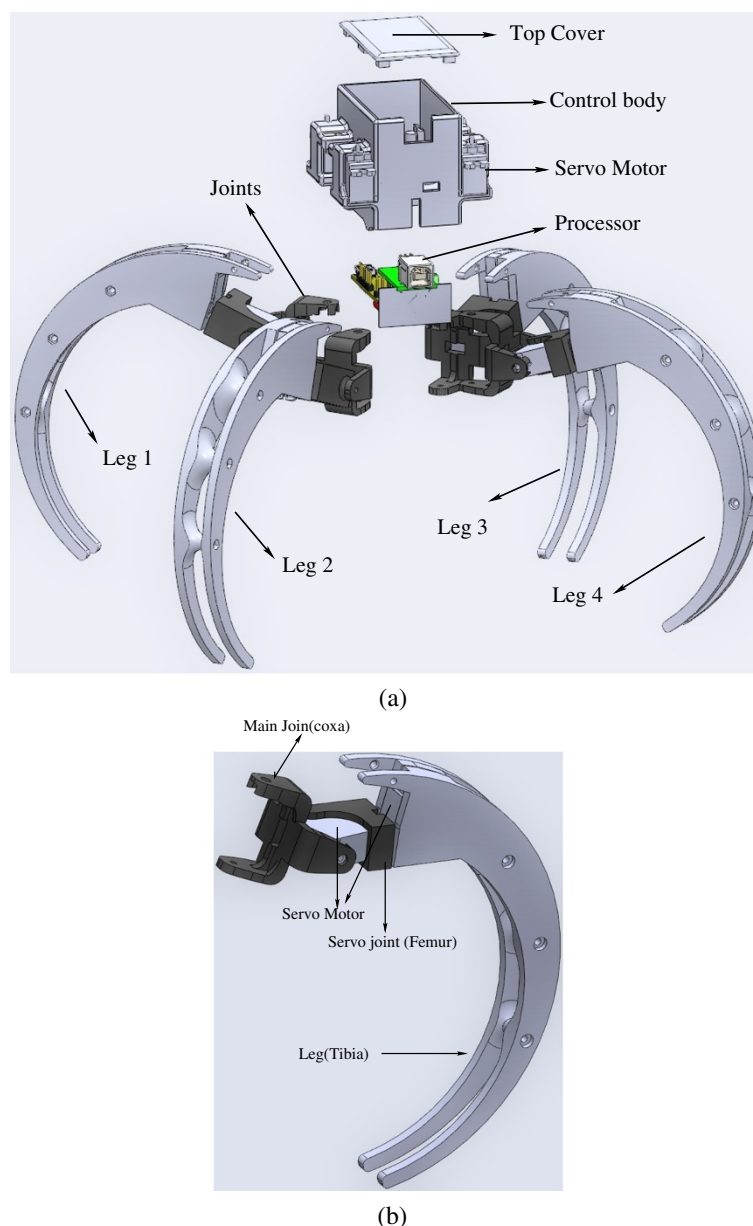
Design of Scorpio robot in exploded view with assembly parts. (a) Robot parts. (b) Robot leg parts.
